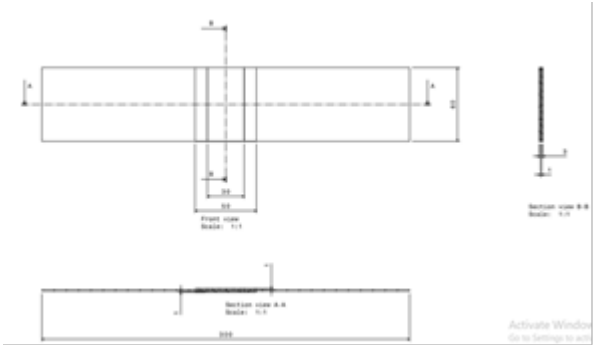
Drafting view of aluminum sheet plate with crack & patch
